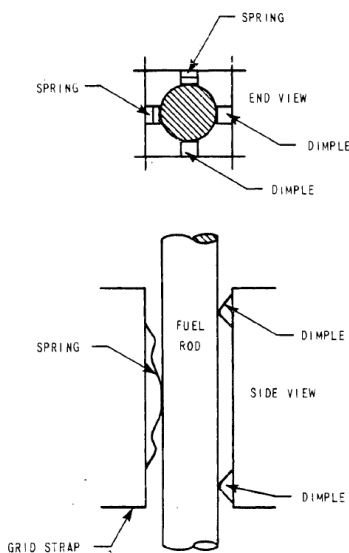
Typical Spring and Dimple Support of Fuel Rod in Fuel Assembly Grid
